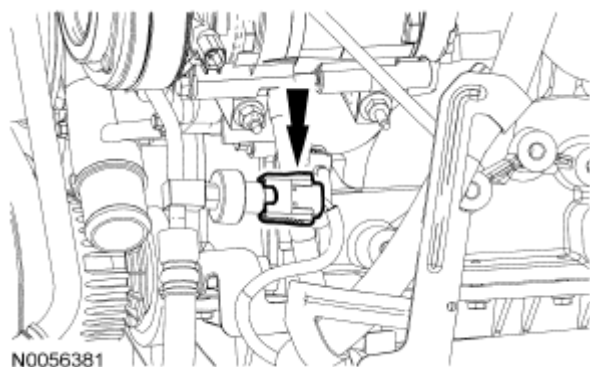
Locating Power Steering Pressure Switch Electrical Connector
